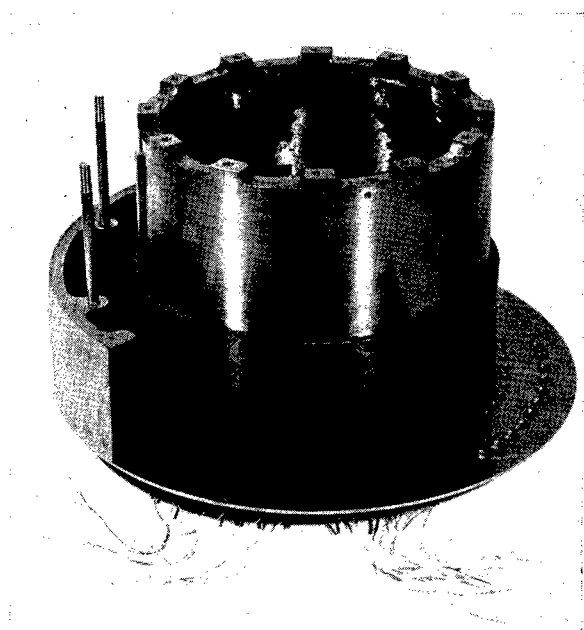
Assembly of first set of stacks and spool of HP-8D transducer.
